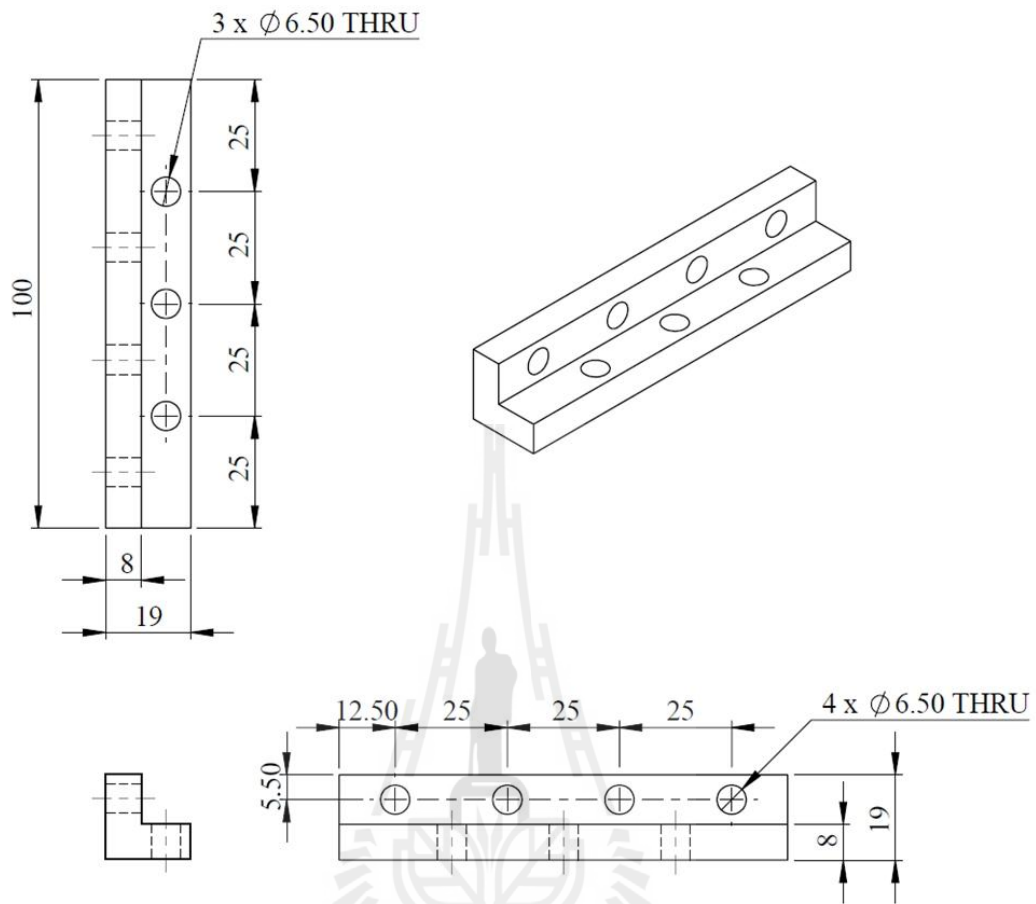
Details of L-shaped steel plate in millimeter scale.
